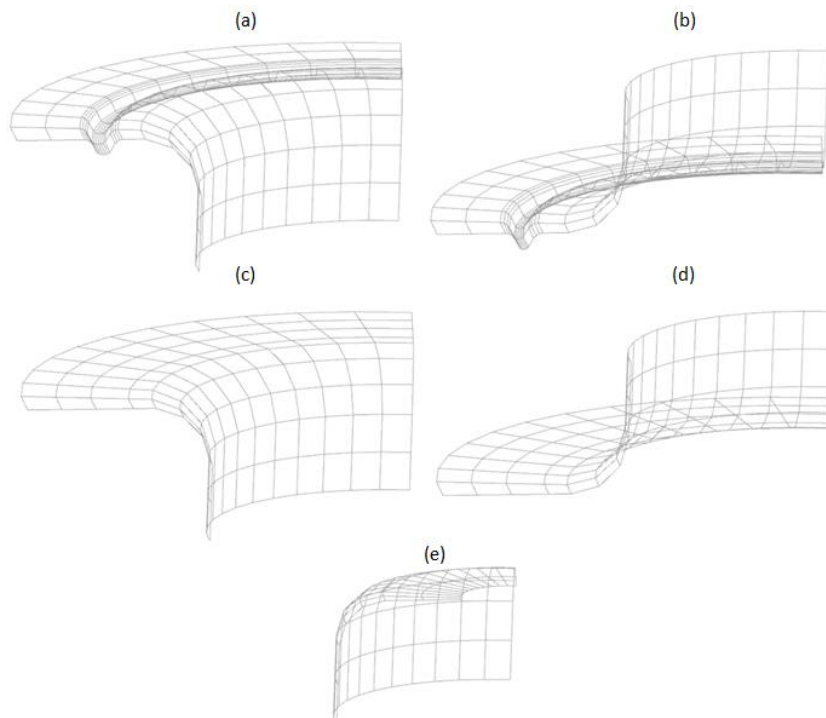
Meshes adopted for the tools of the Marciniak test: (a) Blank-holder (with draw bead); (b) Die (with draw bead); (c) Blank-holder (without draw bead); (d) Die (without draw bead); and (e) Punch.
